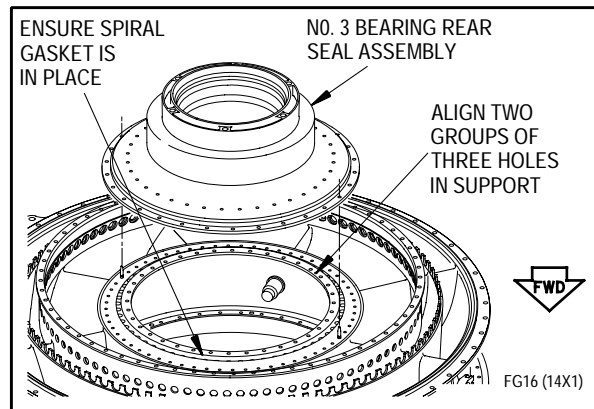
A. Installation of No. 3 Bearing Rear Seal Assembly (PN 4068215)
